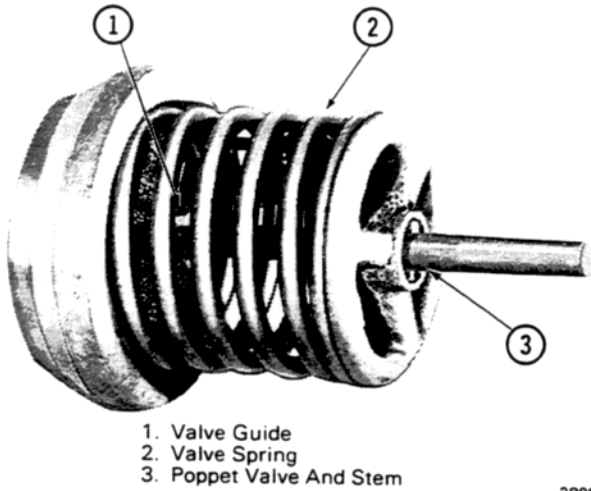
Single Spring Internal Bypass Valve Assembly
